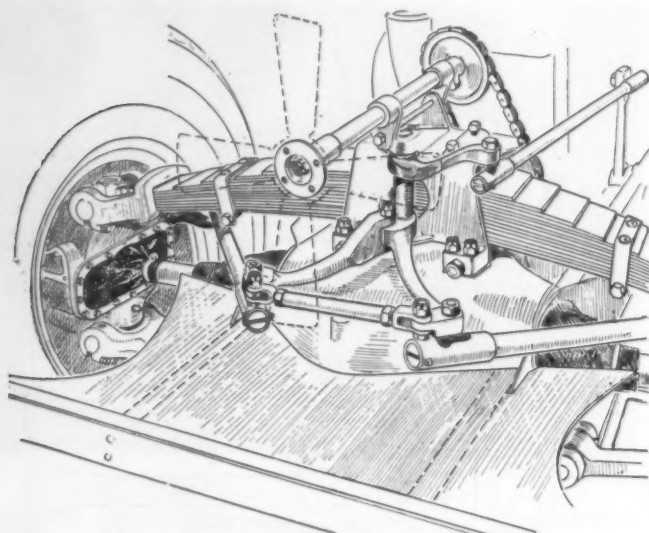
FRONT-DRIVE ASSEMBLY OF THE UPPERCU COACH
